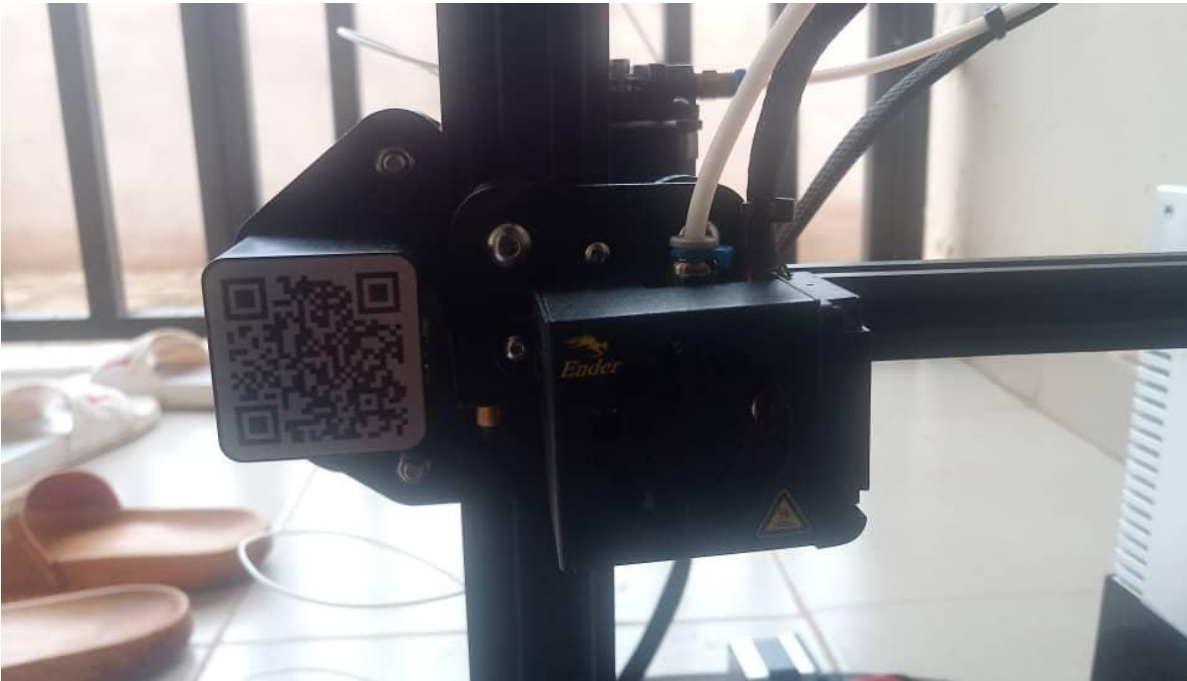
The Nozzle / Printer Head (Shenzhen, 2018)
